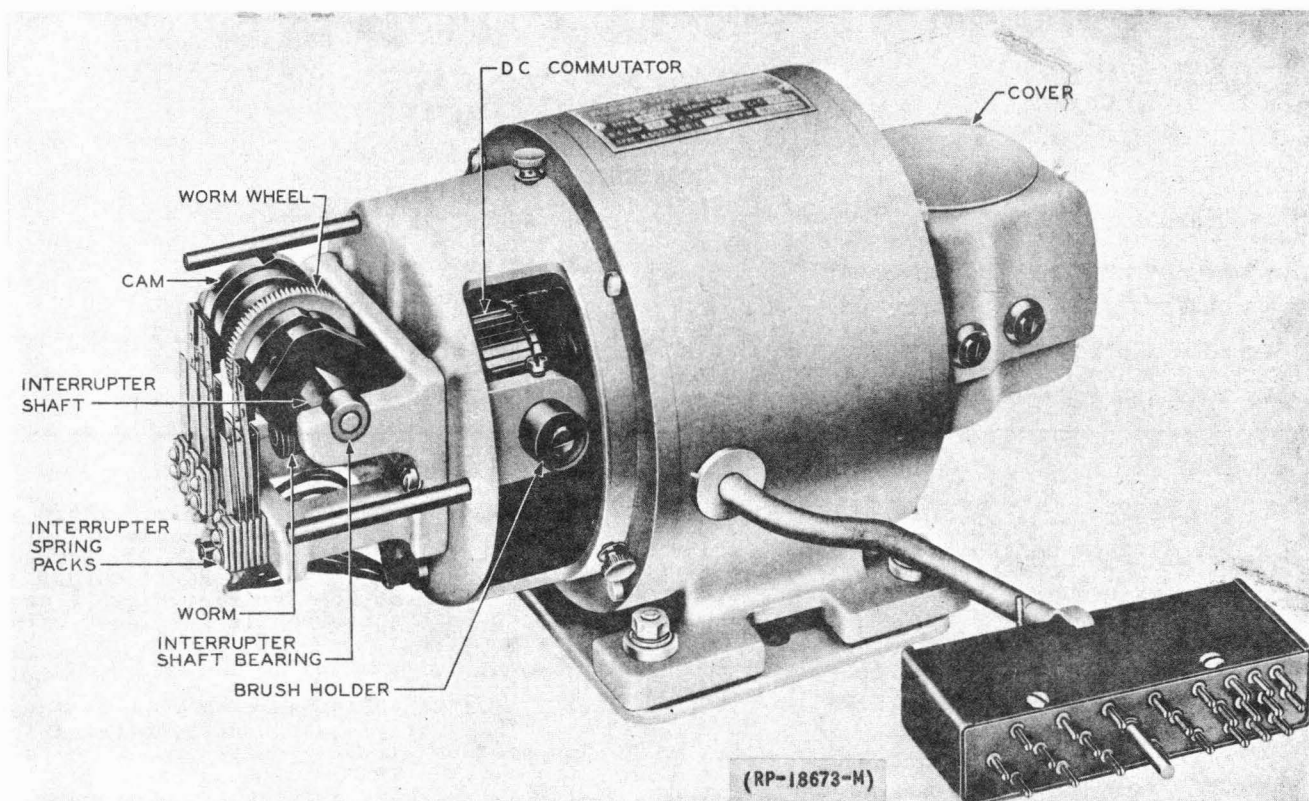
KS-5319-04 (ELECTRIC SPECIALTY CO.) RINGING MACHINE
